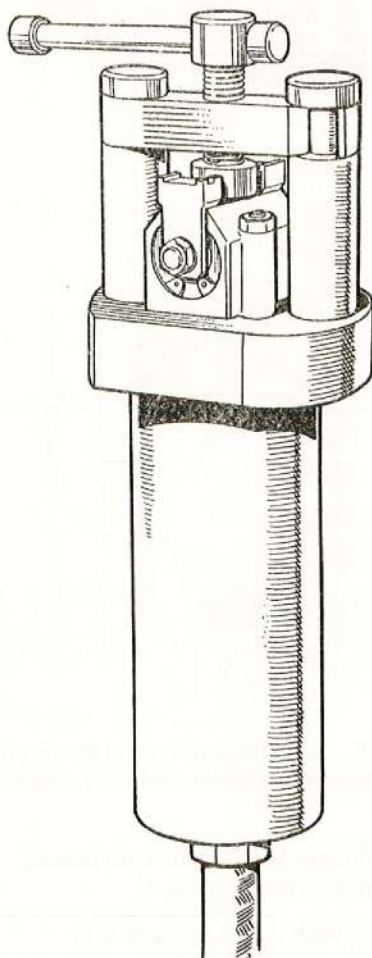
Pressure testing the sensing lever hinge (fixture T.231686)
